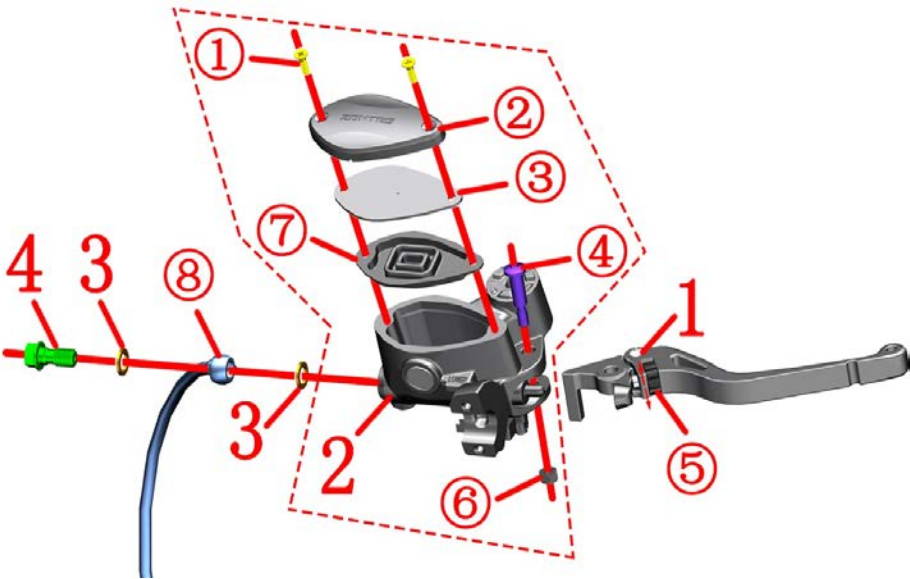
Front Fork Assembly		Add Brake Fluid, Brake Lever Adjustment		CHK
